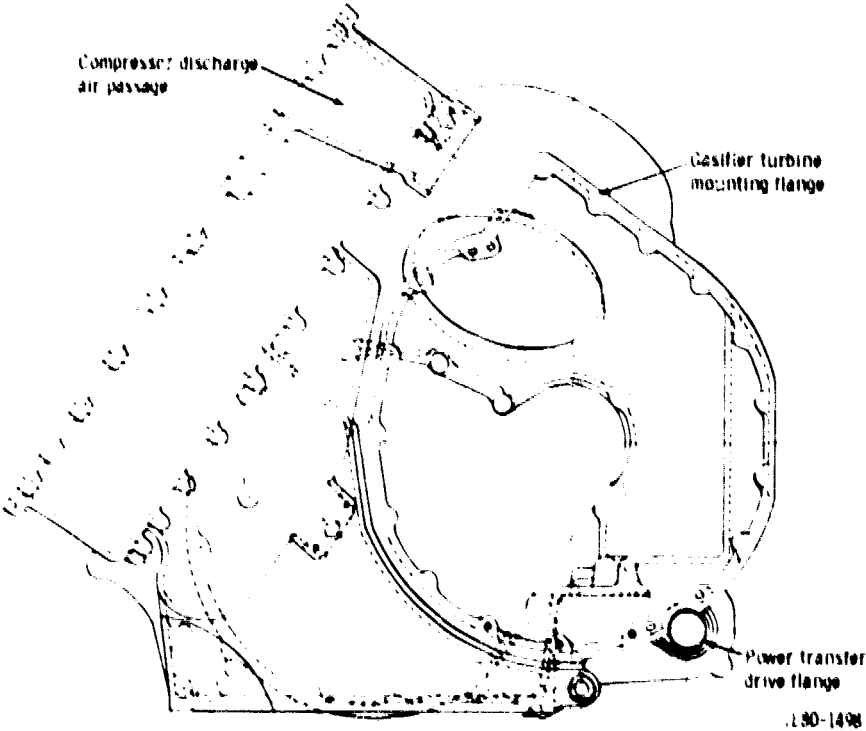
AGT-100 Engine Block--View Into Gasifier Turbine Flange.
